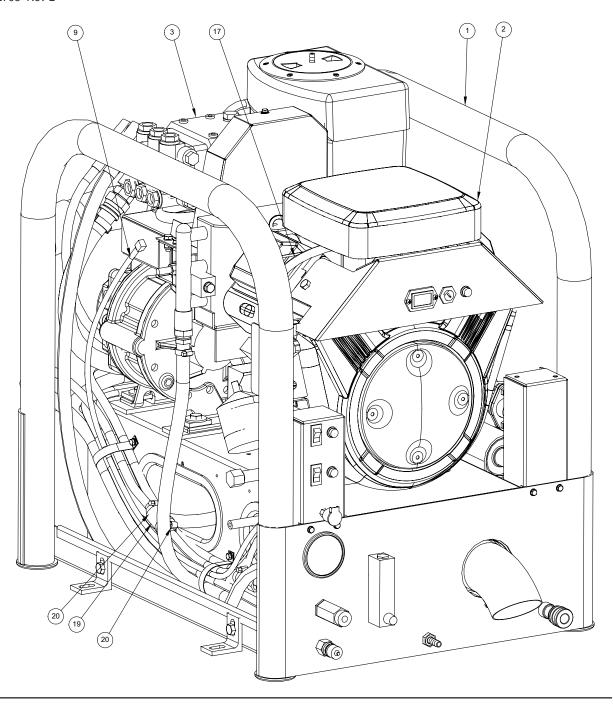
Machine Assembly - Front Right View D-2793 Rev L
